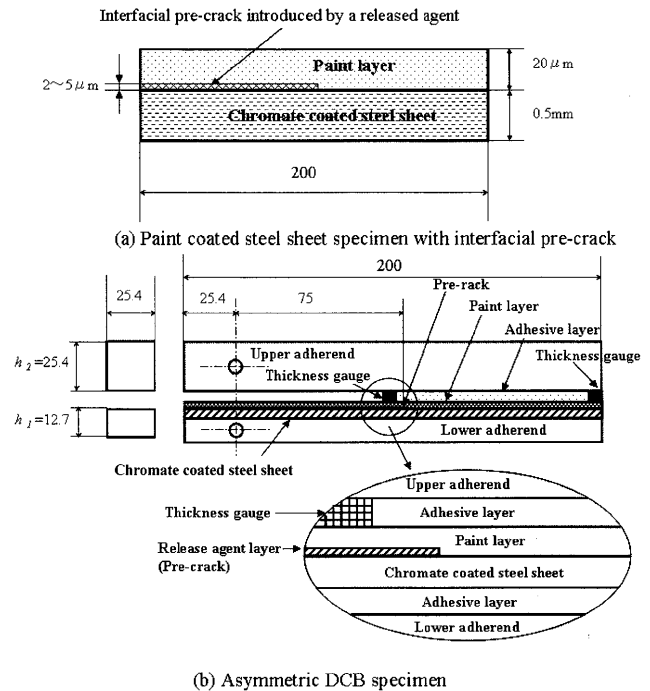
Shape and sizes of the asymmetric DCB specimen for evaluating interfacial fracture toughness between paint layer and steel sheets.
